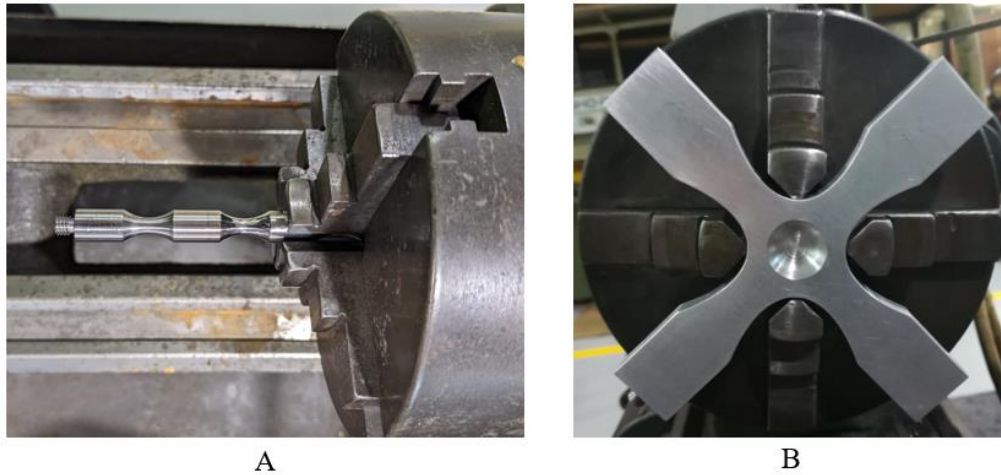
Turning lathe for surface polishing: (A) Tension-Torsion specimen; (B) Cruciform specimen.
